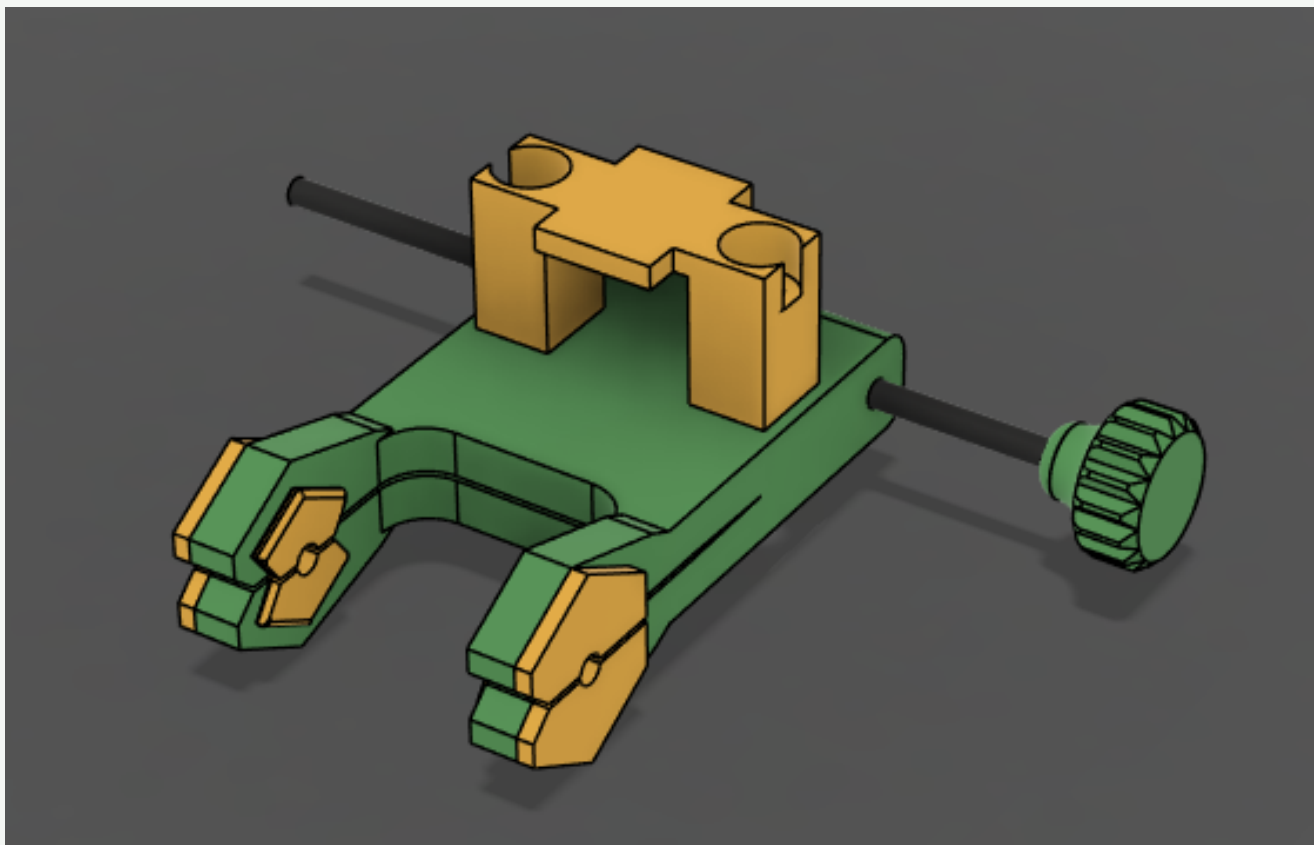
Spring-steel shaft with Knob_Welle_Schwinge.
